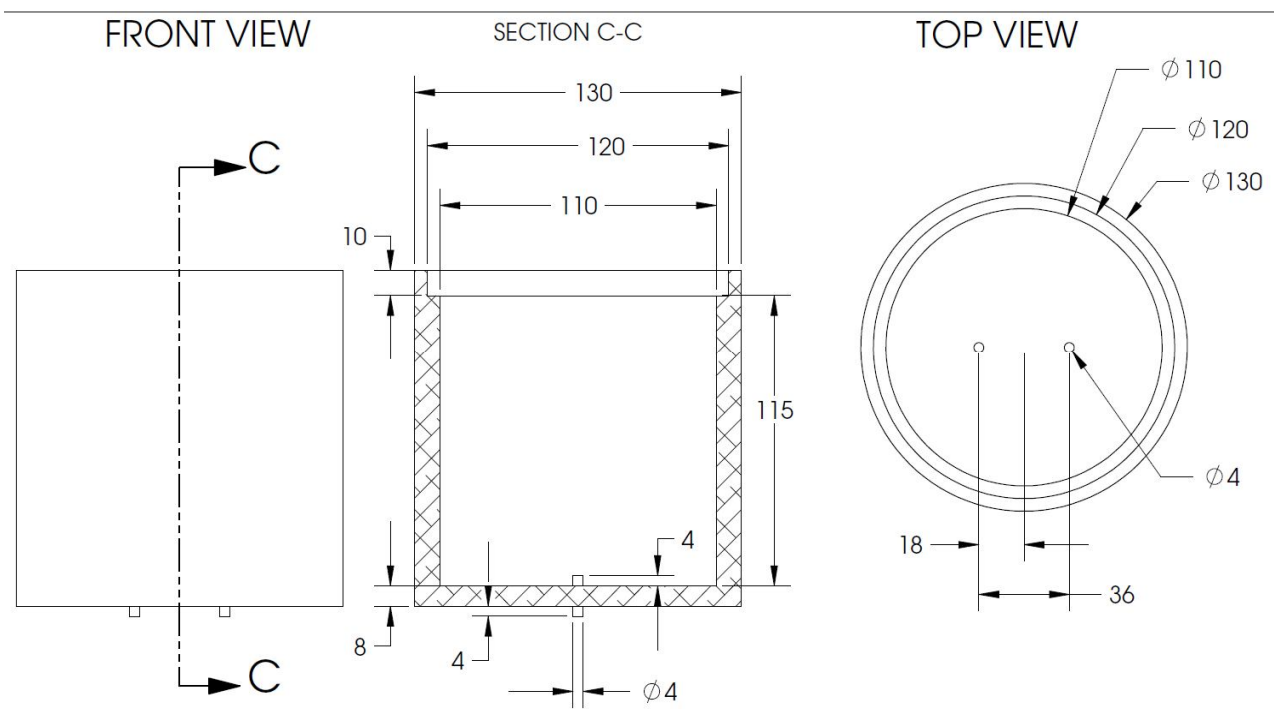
Alumina spindle specifications. Dimensions are in millimetres.
